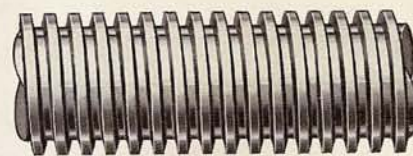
Section of Acme Thread Lead Screw Actual Size
